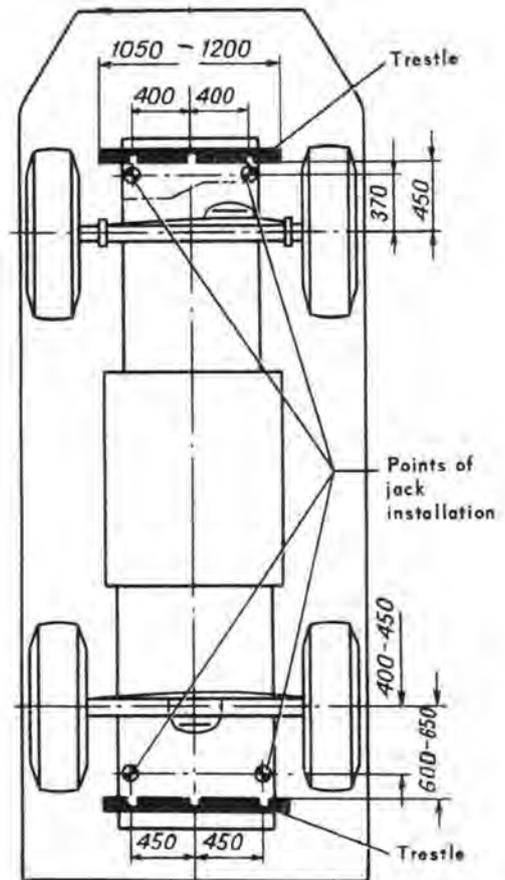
POSITION OF JACKS AND TRESTLES WHEN JACKING-UP БРДМ-2 VEHICLE
